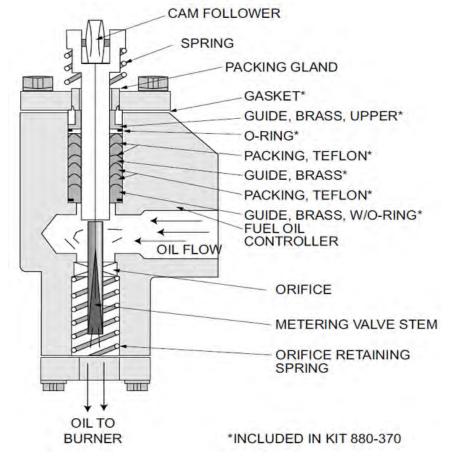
Fuel Stem Packing, Cross-Section
